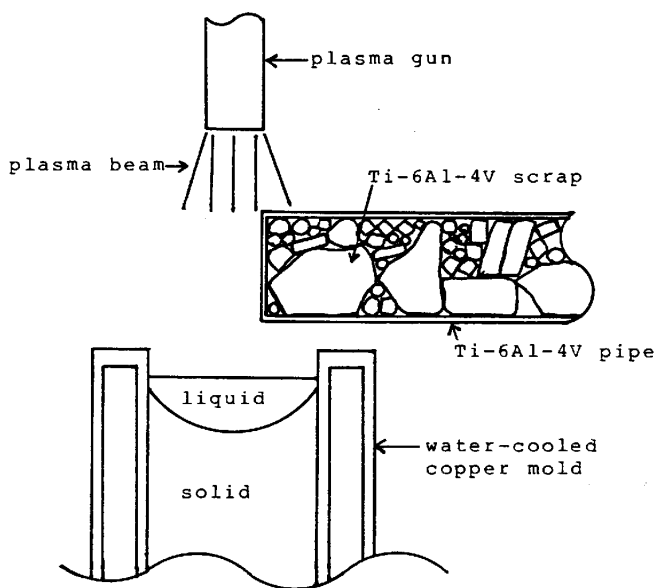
Schematic drawing of the developed method using vacuum plasma electron beam melting
